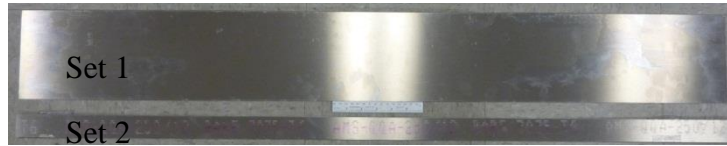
Received AA7075-T6 welding sheet (two sets)
